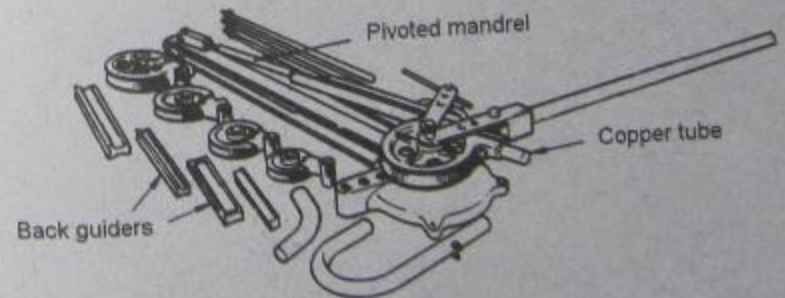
DRAW BAR BENDING MACHINE WITH PIVOTED MANDREL
